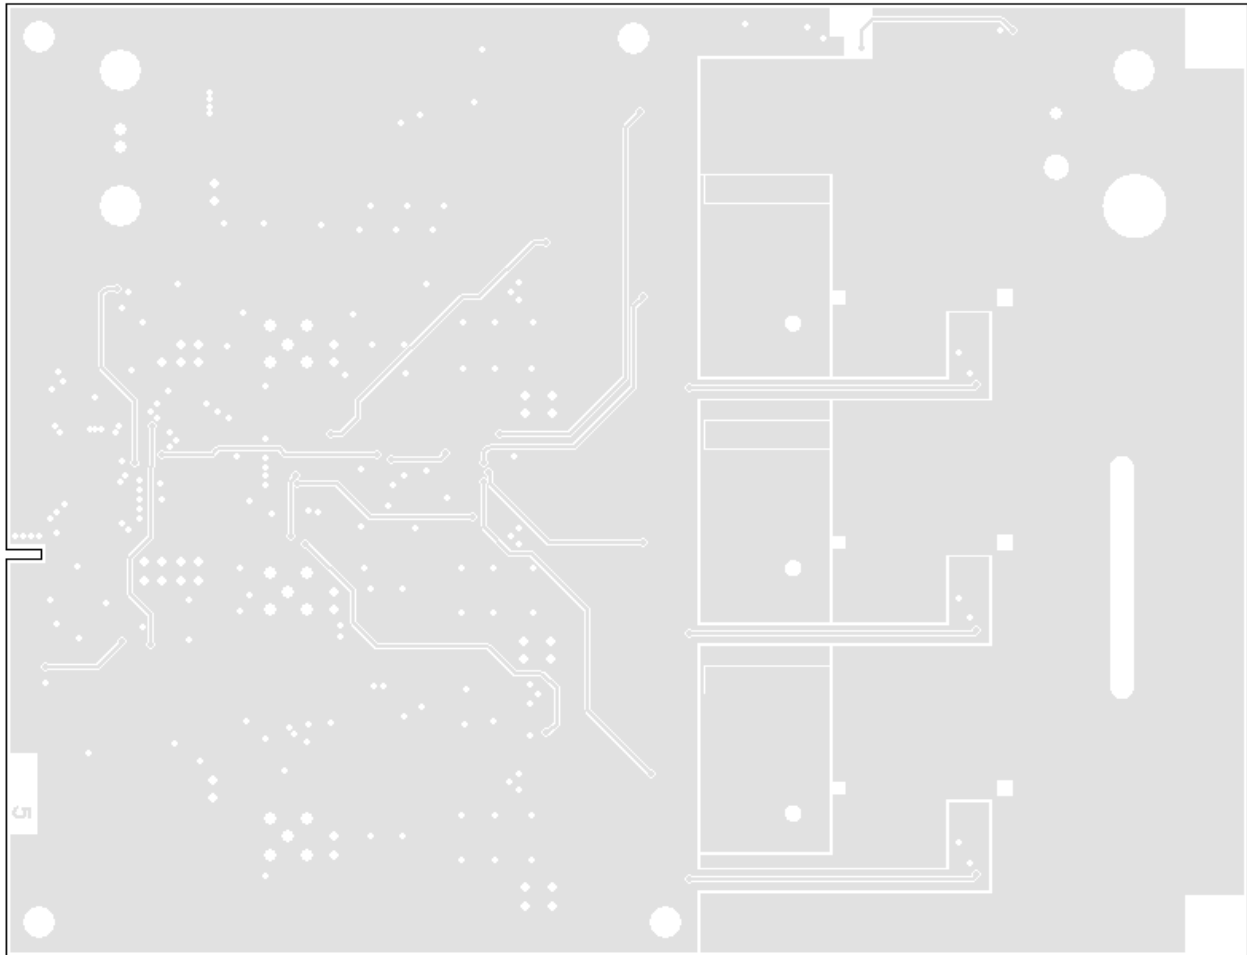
EPC7C006/FBS-GAM02 3-Phase Motor Driver Eval. Board Inner Layer 4 Copper Etch (1 oz).
